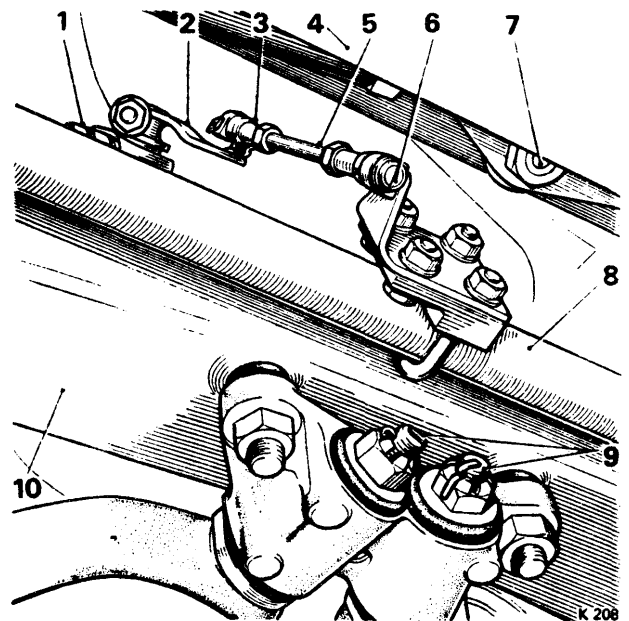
OPERATING LINKAGE—FRONT HEIGHT CONTROL VALVE
